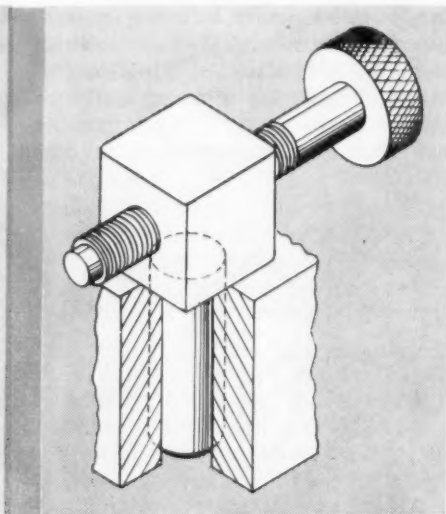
Clamping arrangement in which horizontally located clamping screw is swung about vertical pivot of square-head design.
